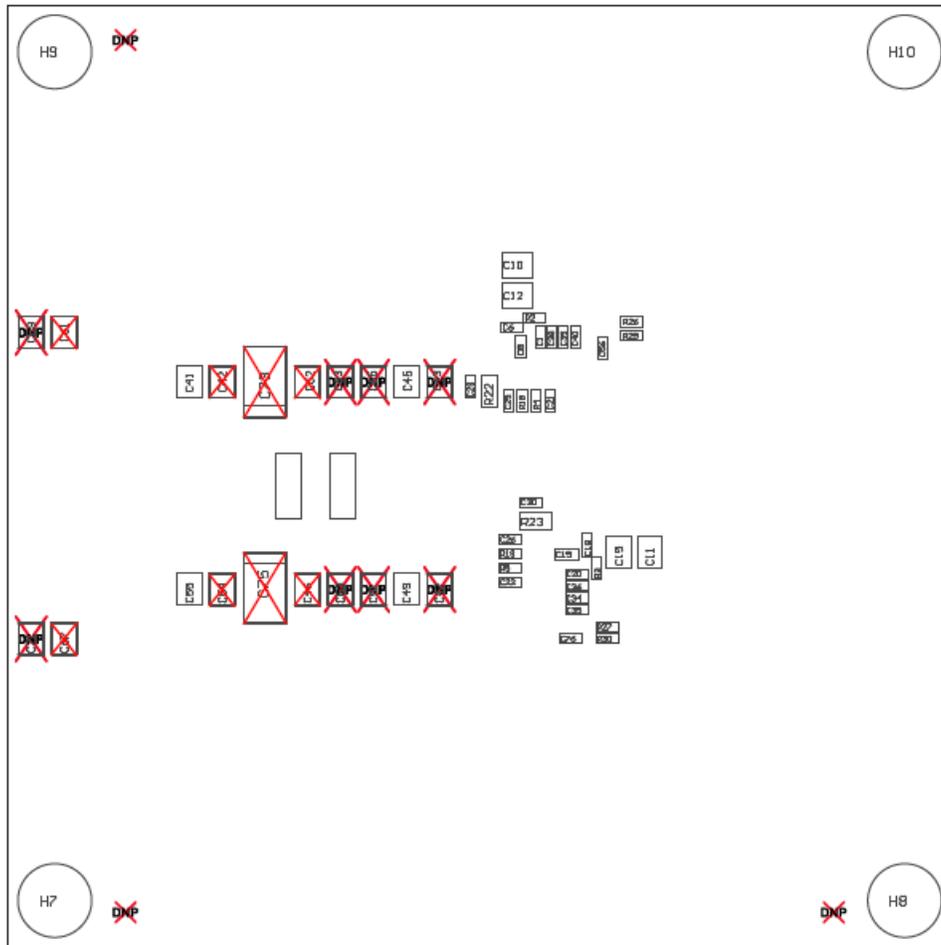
TPS546C20AEVM2-746 EVM Bottom Assembly Drawing (Bottom View)
